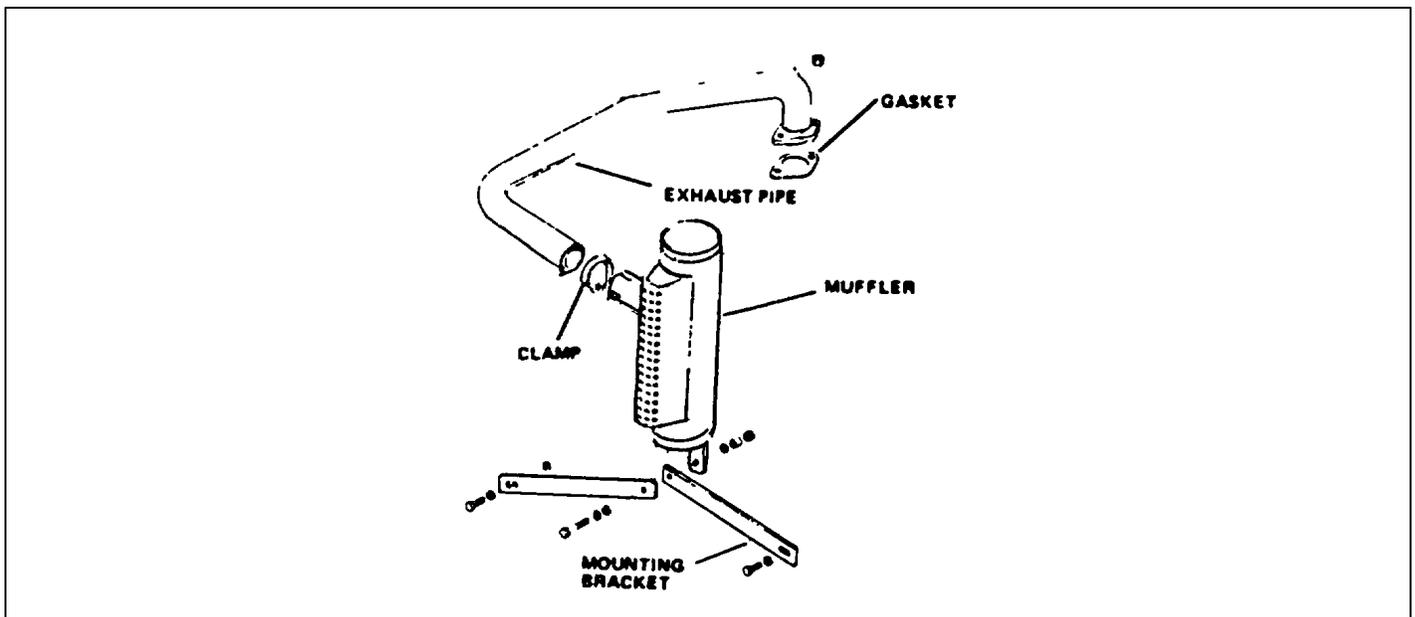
Exhaust System: Muffler, Exhaust and Tail Pipe (Typical)
